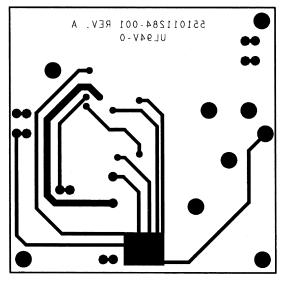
Recommended micro SMD PC board layout: Inner layer  $V_{\text{CC}}$  layout
